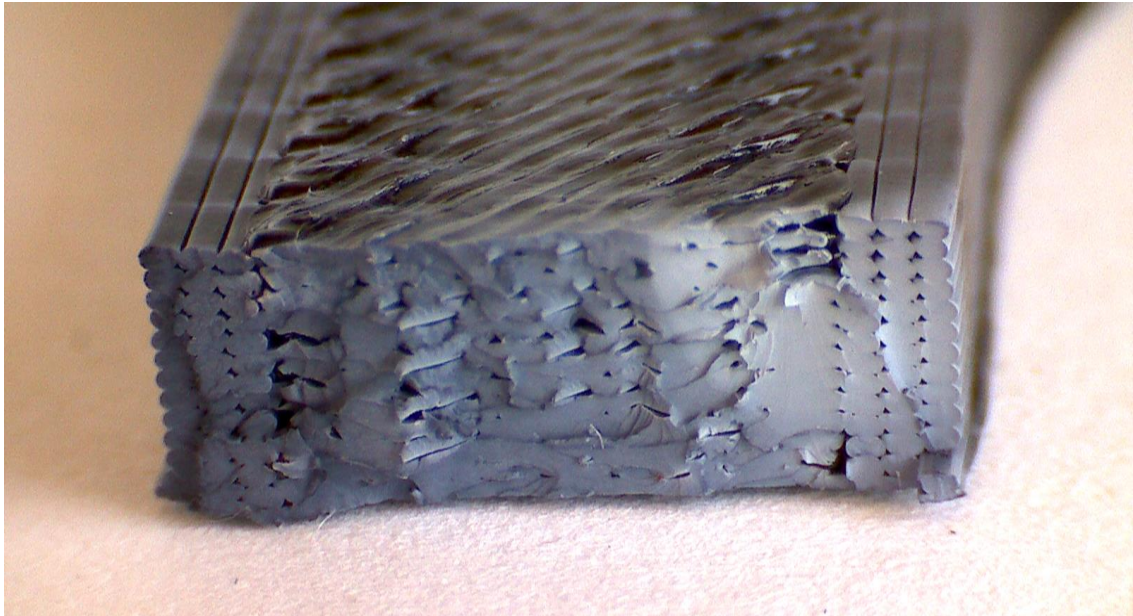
Fracture of ABS. Printing settings used see table 2 and 4
